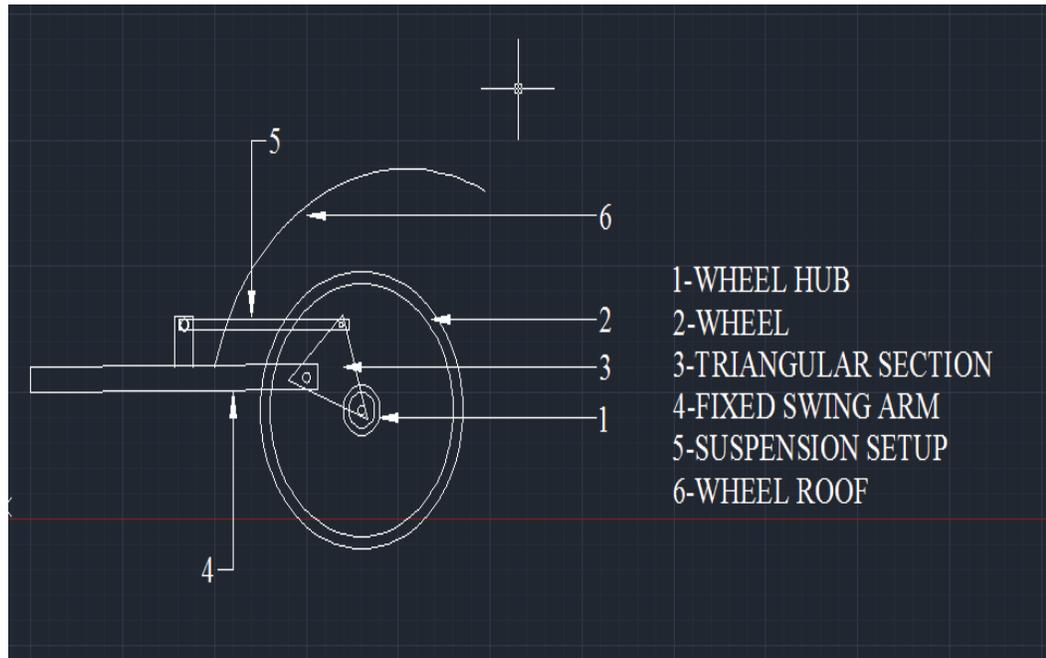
Layout of modified horizontal dual suspension system.
